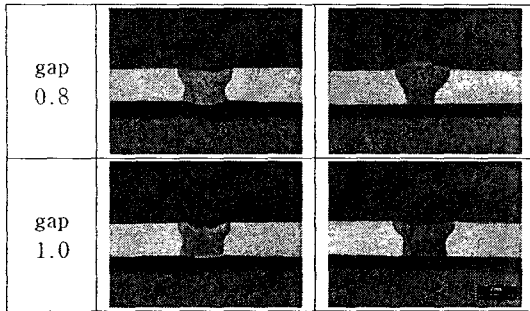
Welding bead shape without/with controlled wire feeding
